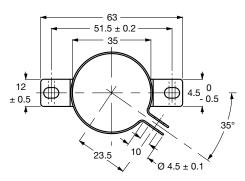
Dimensional outline of clamp for case Ø D = 35 mm
